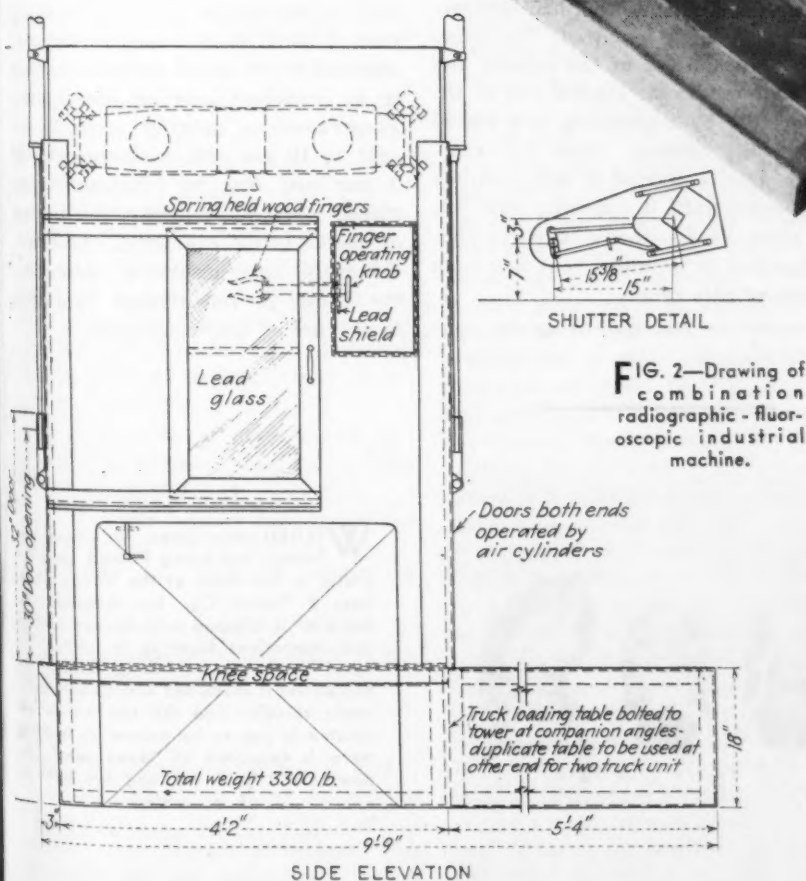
Drawing of combination radiographic - fluoroscopic industrial machine.
